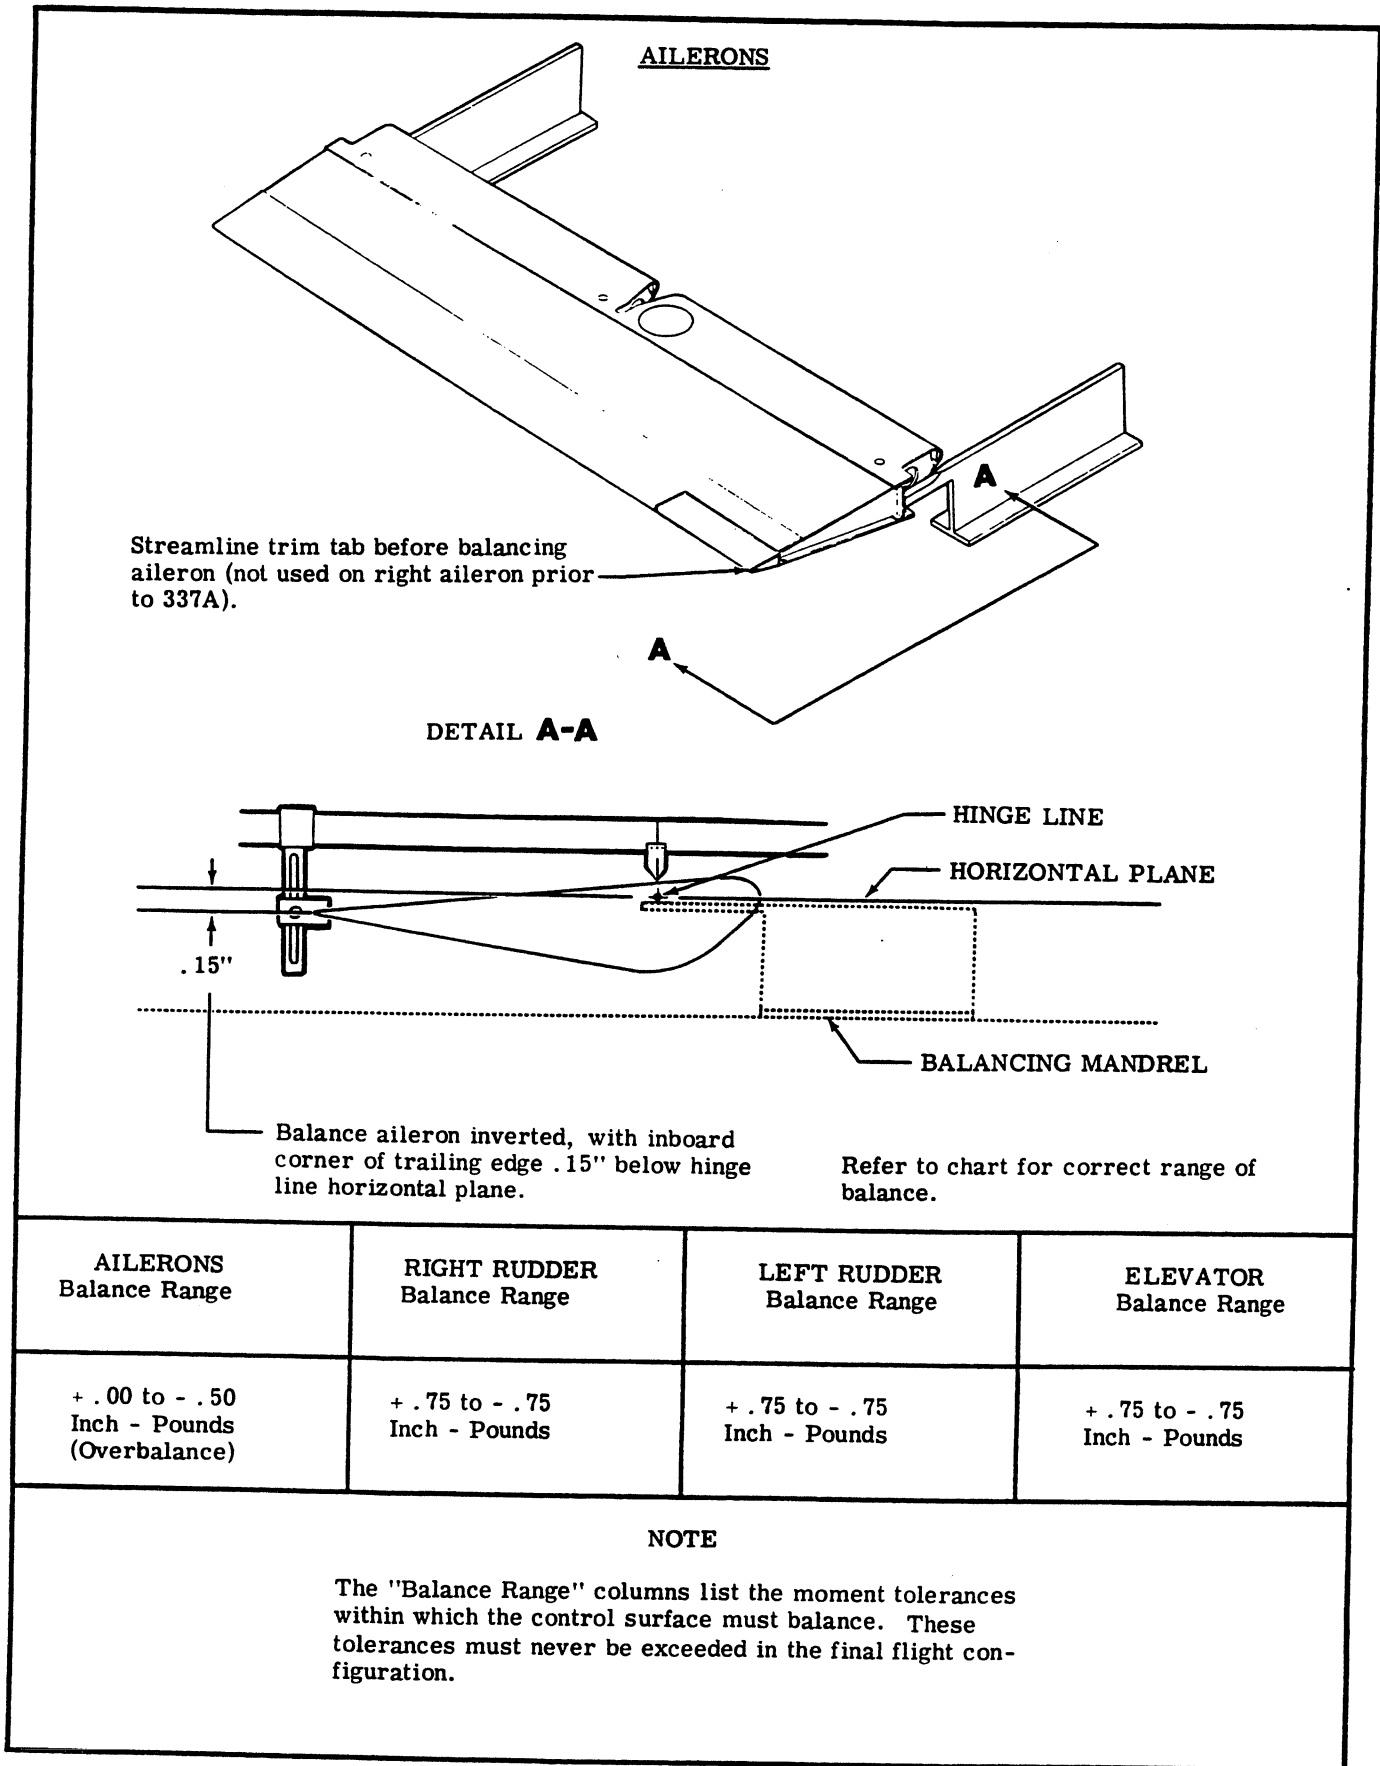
Control Surface Balancing (Sheet 3 of 3)
